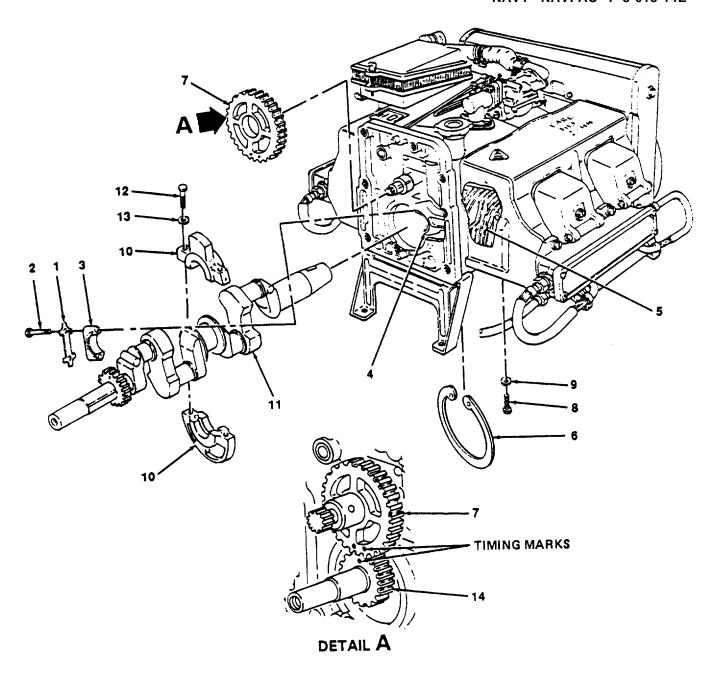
Crankshaft and Center Main Bearing, Installation.
